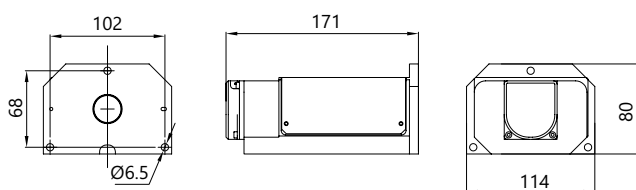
Outline drawing and dimensions of 3 mm fiber bundle
